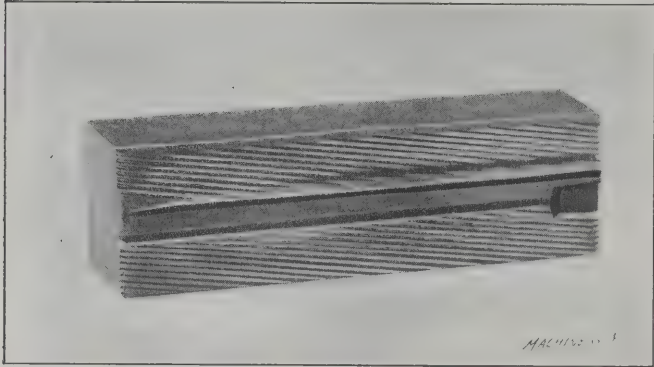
A Reversible Thread Rolling Die for Wood-screws
